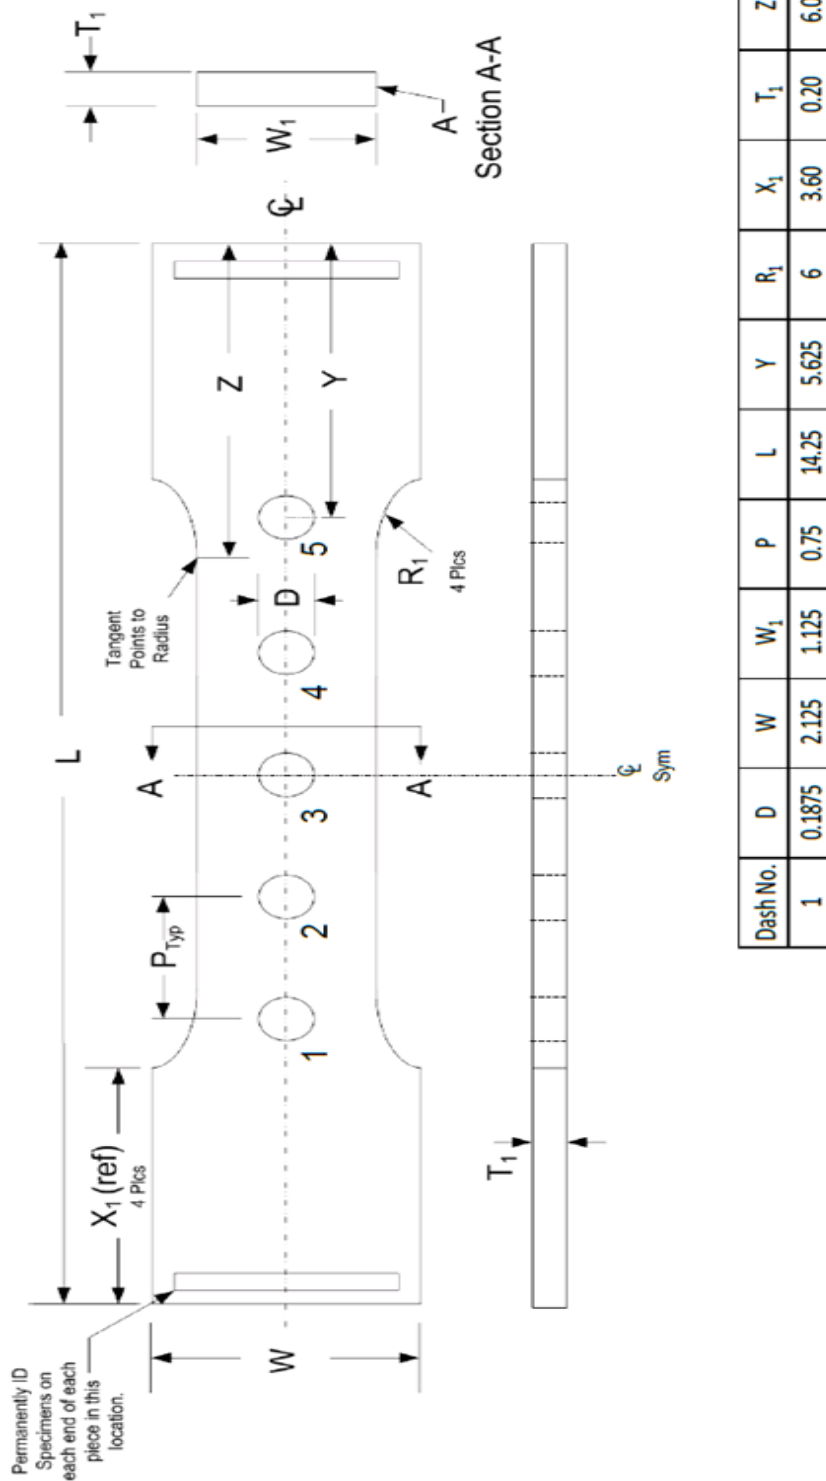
Fatigue Dogbone Bolt in Radius – Part A
